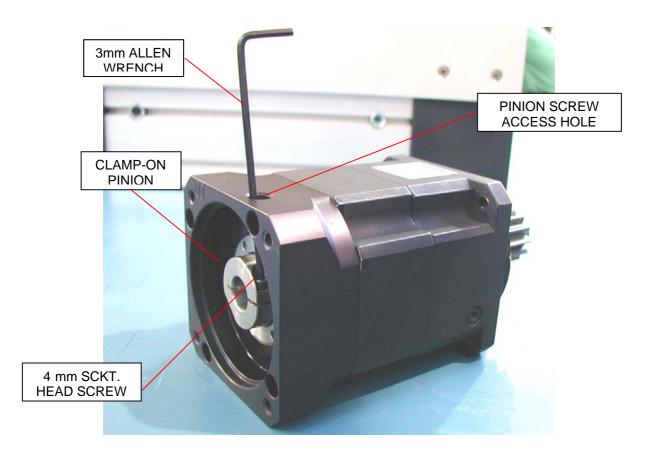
"SERVOMOUNT" Gearbox to Motor Mounting System
